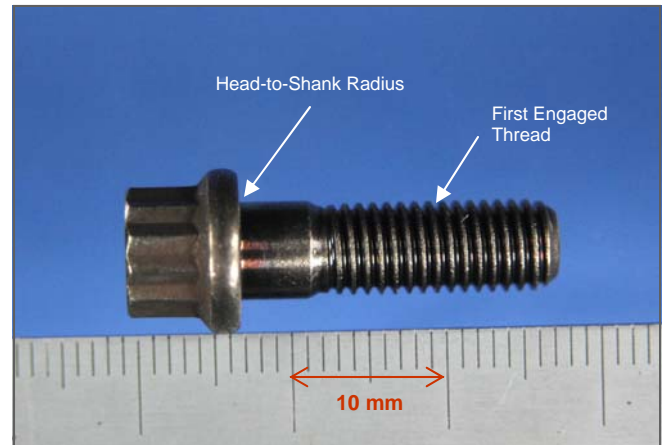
Common Locations for Fatigue Crack Initiation in a Bolt
